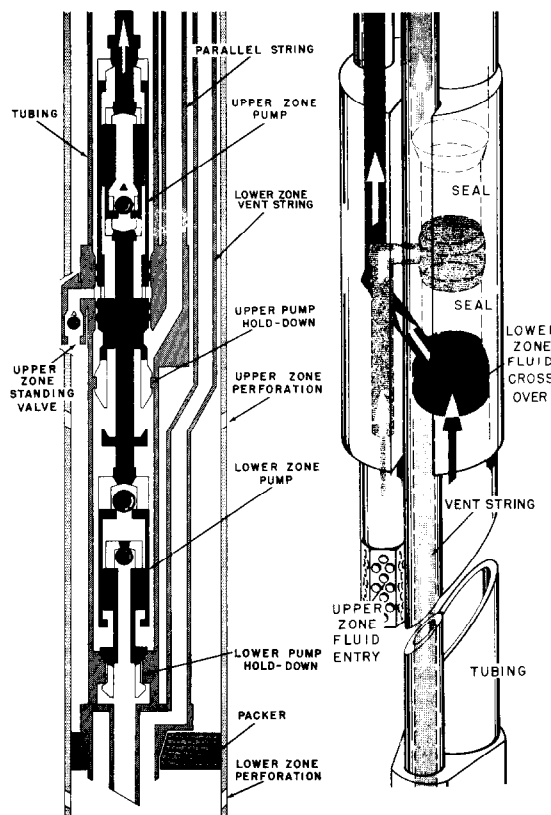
Single-packer Vented Dual-zone-pump Installation
